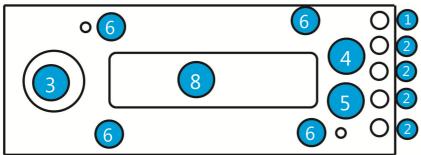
LCD module layout, front and back, rotary encoder version 2x16
